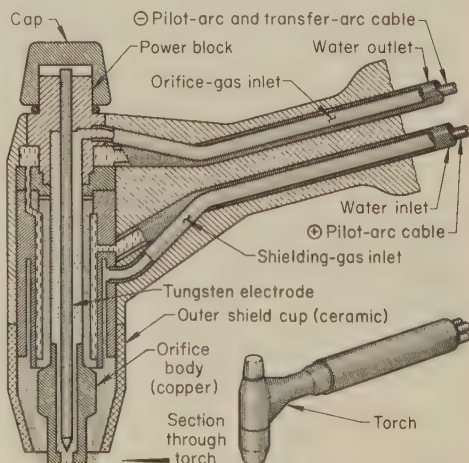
Typical torch for manual plasma-arc welding
